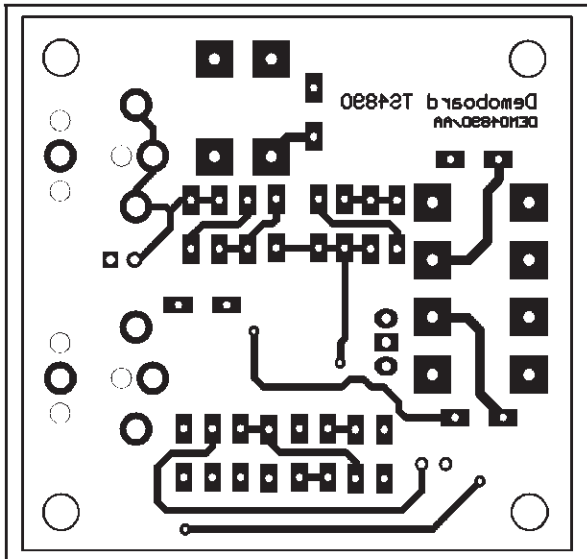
SO8 & MiniSO8 Demoboard Bottom Solder Layer
